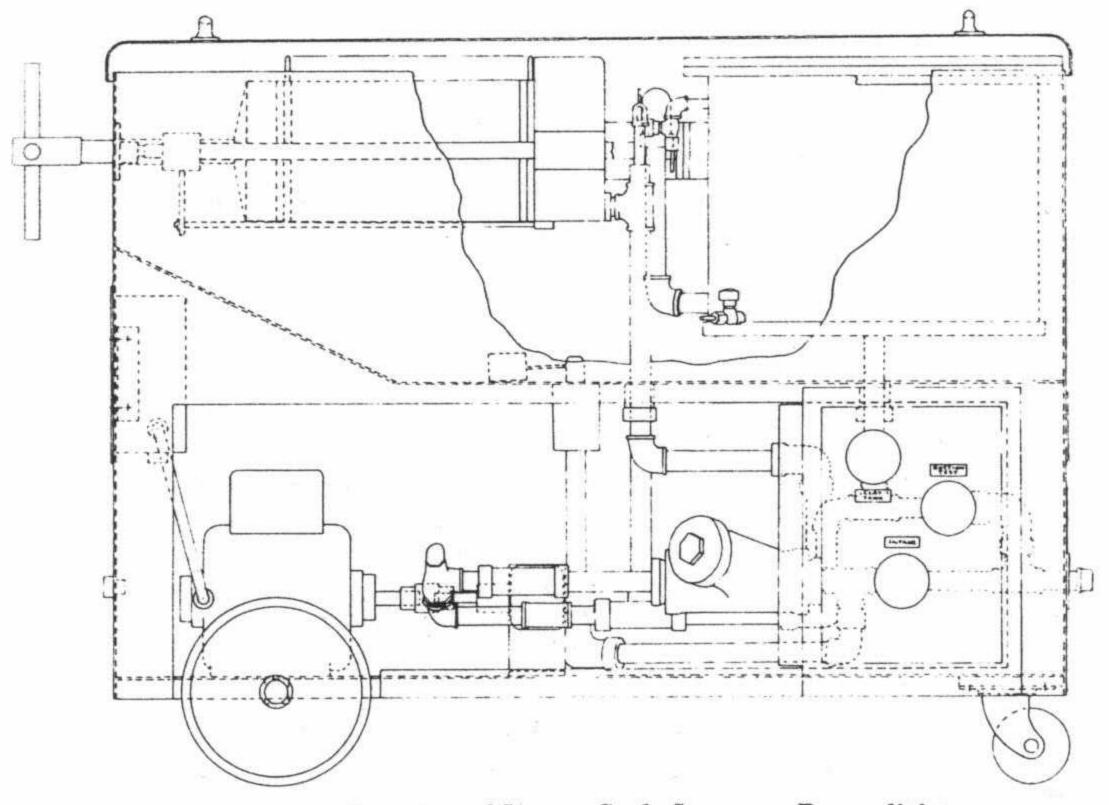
Cutaway Drawing of Latest Style Inerteen Reconditioner
